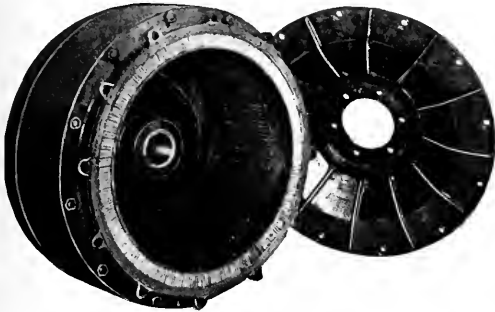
INTERIOR VIEW OF ELECTRIC MOTOR.
